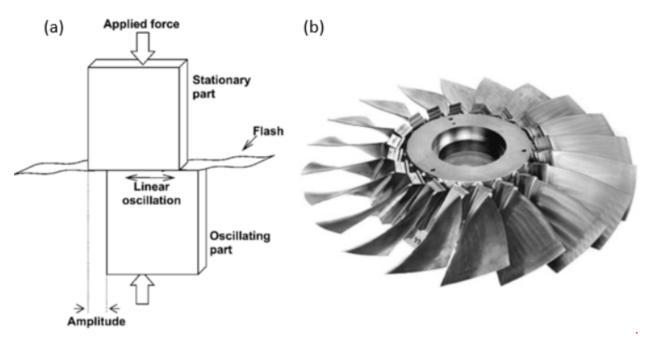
(a) Diagram of Linear Friction Welding process, (b) Integrated blisk (disc and blades) [35.3].
